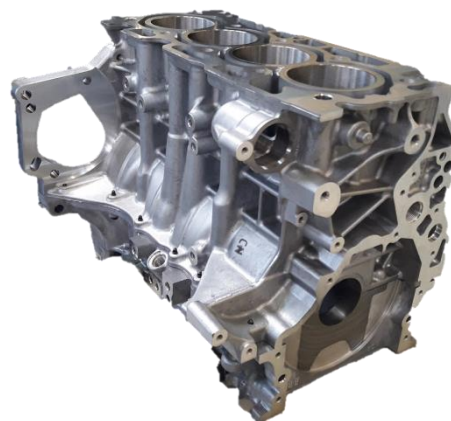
Studied workpiece – cylinder block of DV5R engine.
